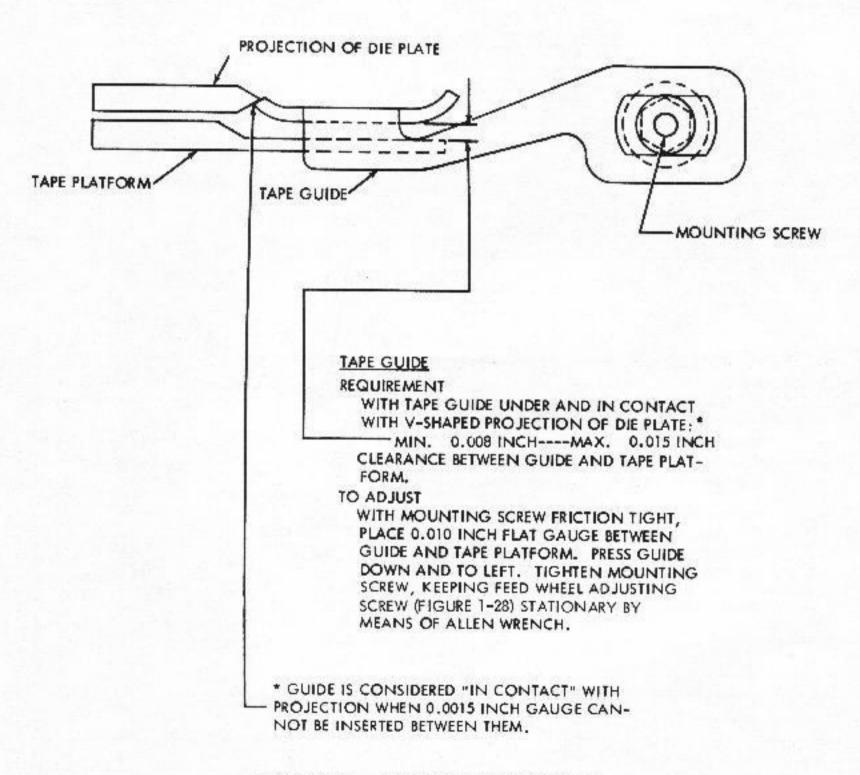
FEED WHEEL AND TAPE GUIDE
